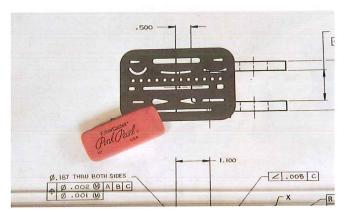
An erasing shield can be used to protect parts of a drawing that are not to be removed.
